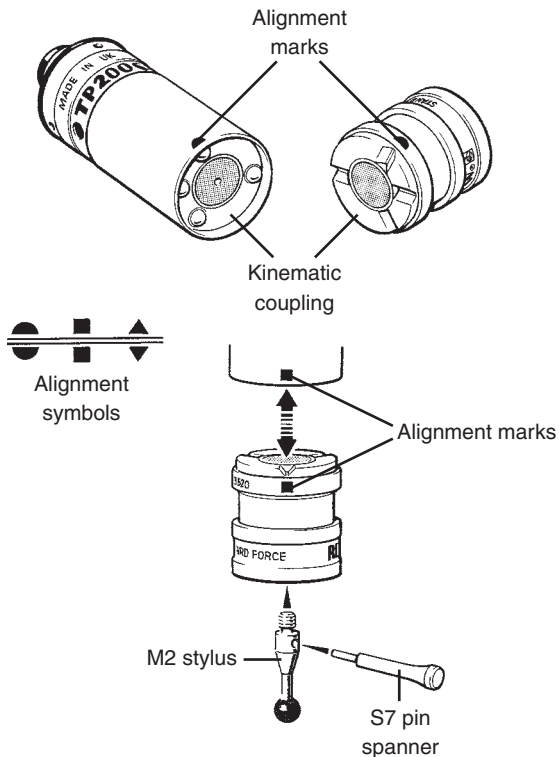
Assembling the stylus on the stylus module and mounting the stylus module on the probe body
